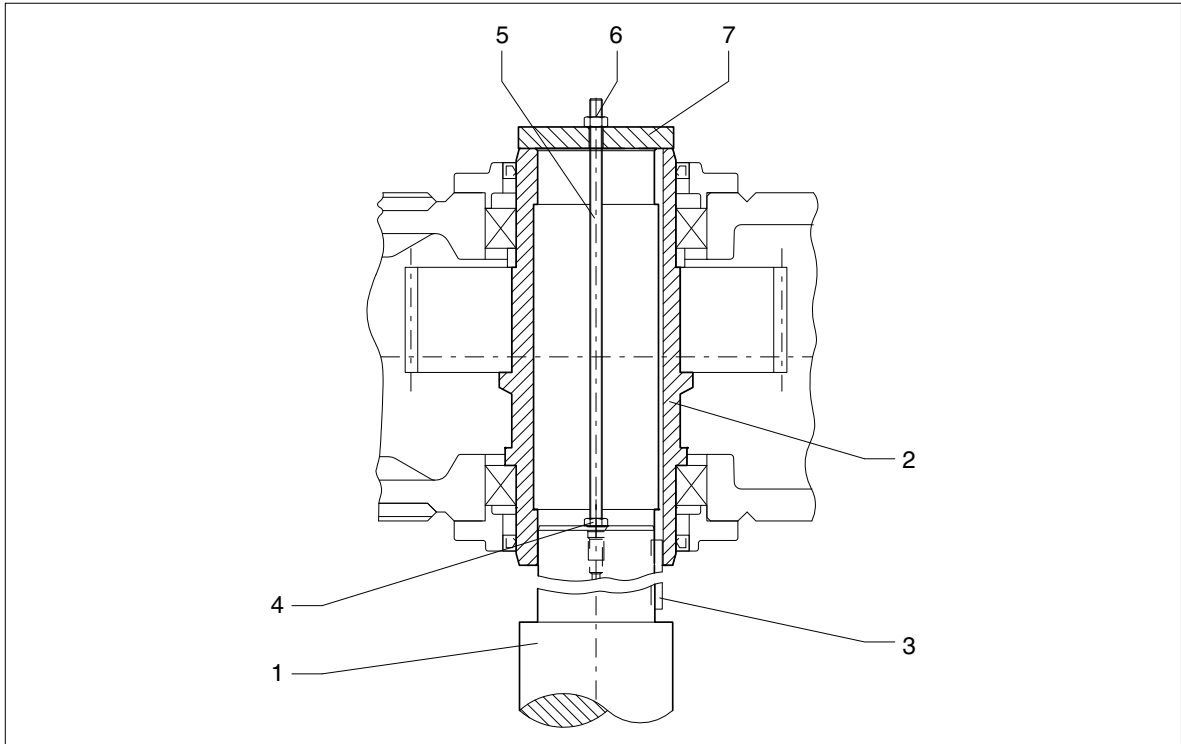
Hollow shaft with parallel keyway, fitting with threaded spindle
